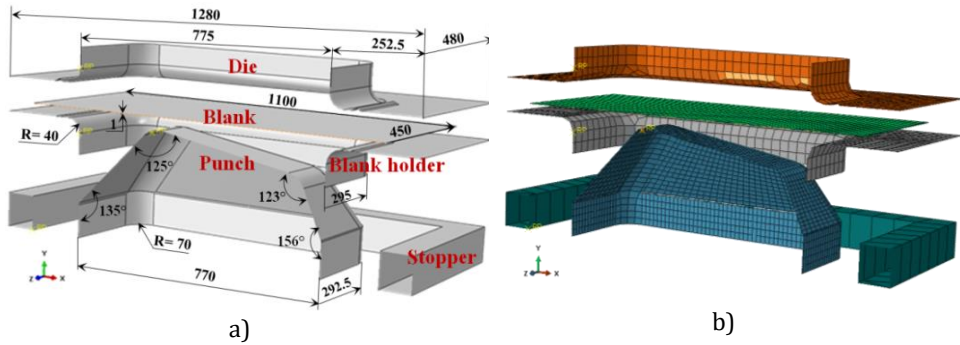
Forming tools and blank, a) Drawing and b) Meshing
